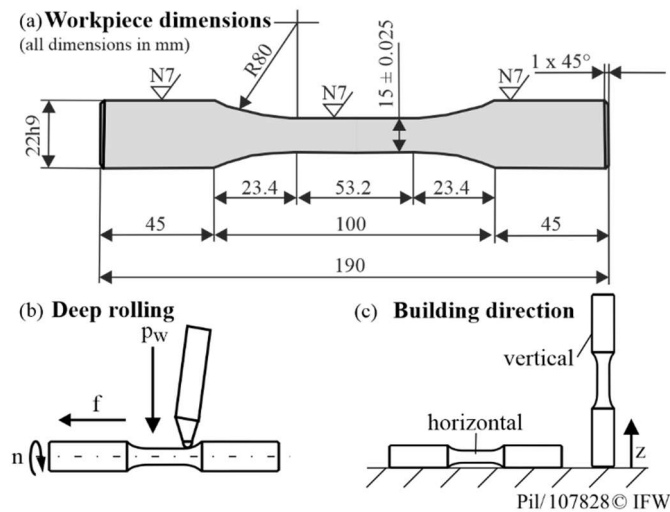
(a) Workpiece dimensions, (b) Deep rolling (c) Building direction
